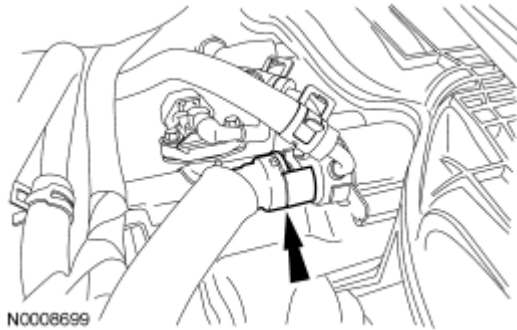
Locating Quick Connect Crankcase Vent Hose
